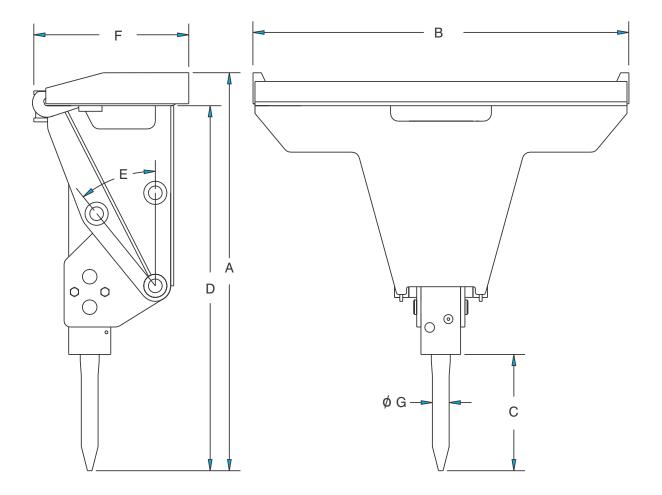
Dimension Drawing - Model AR 62 2-Position Skid Steer Configuration (SSU-2)
